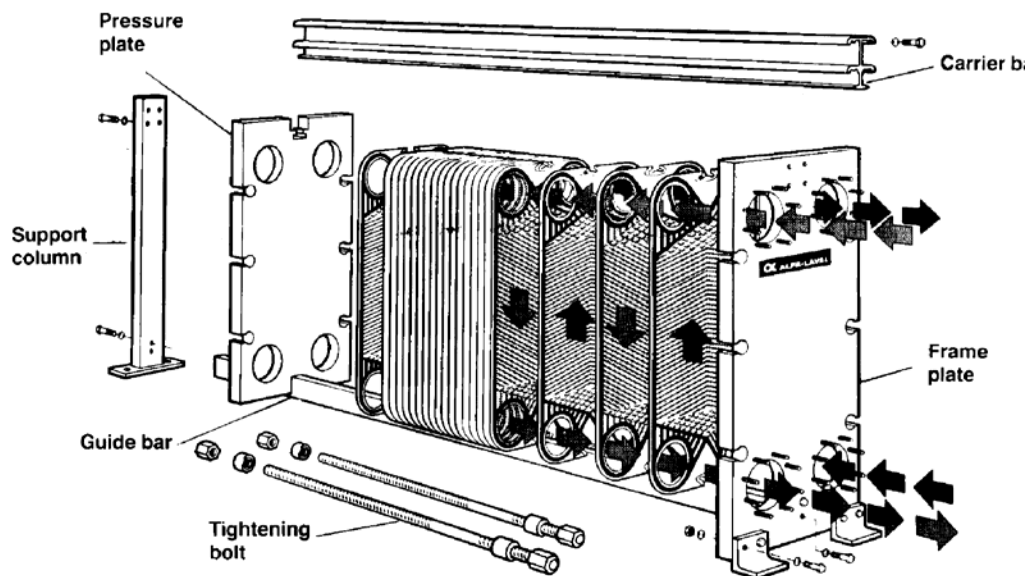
Exploded view of a plate heat exchanger (courtesy Alfa Laval)
